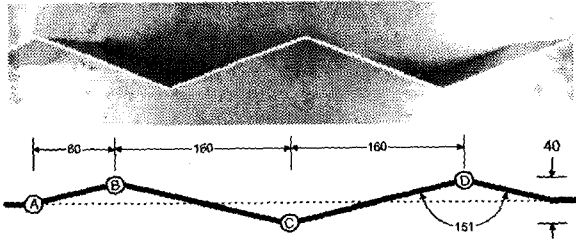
Photograph and schematic of manufactured seam's dimension and unit[mm]
